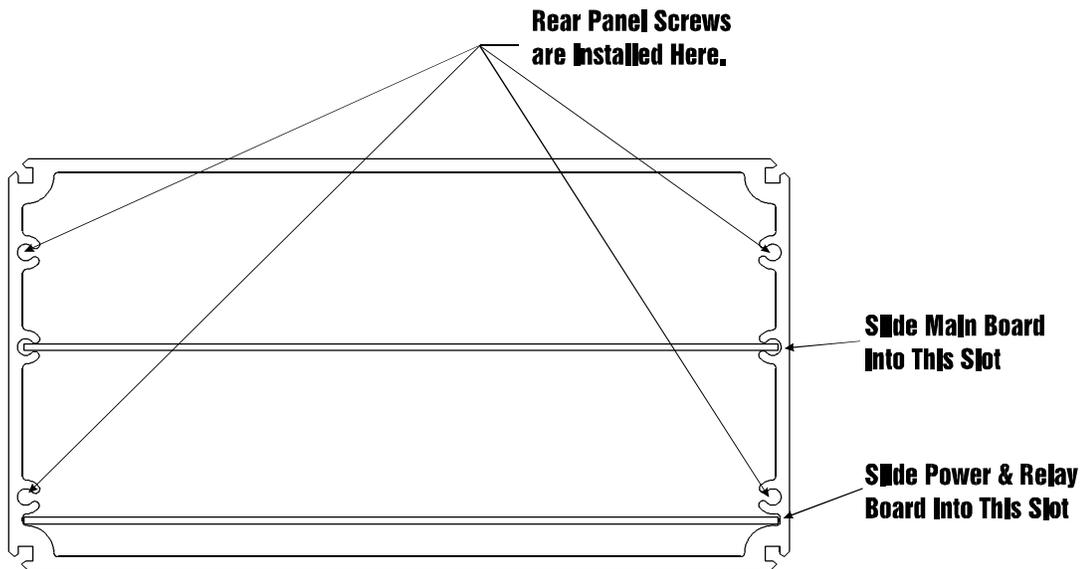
HI 2151/20WC Housing for Main Board, Power and Relay Board Alignment
